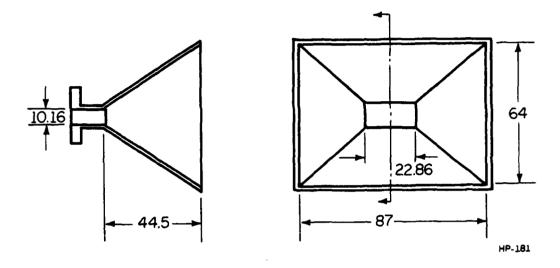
Inside Dimensions (mm) of the X-band horn.
